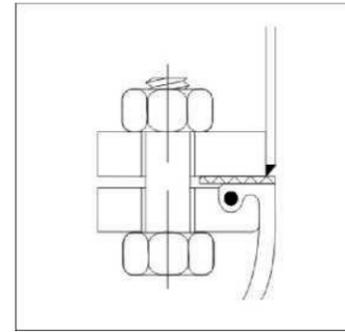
Flange provided with flat sealing gasket to protect the rubber surface.
